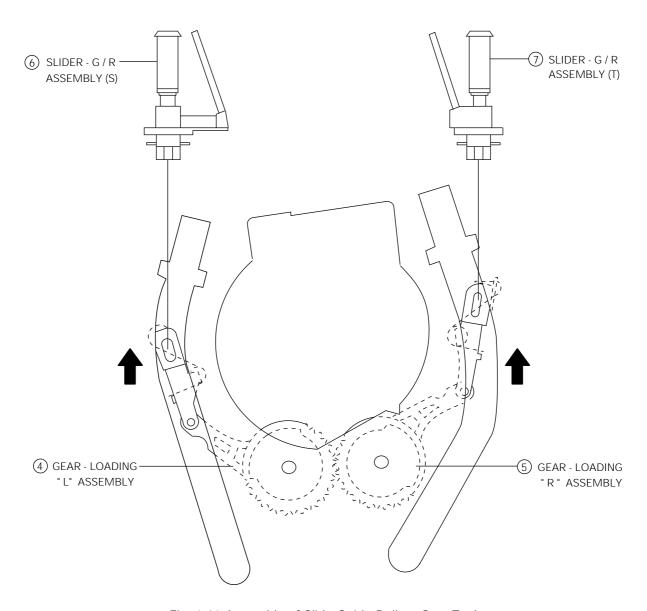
Assembly of Slide Guide Roller "S", "T" Ass'y
